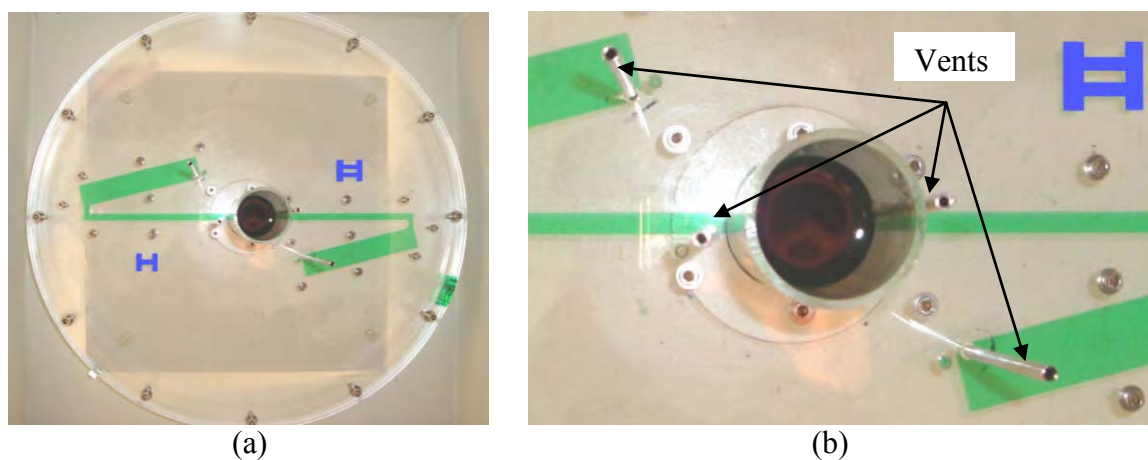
23. Assembly for (a) indirect gated mould and (b) close-up showing position of vents.
